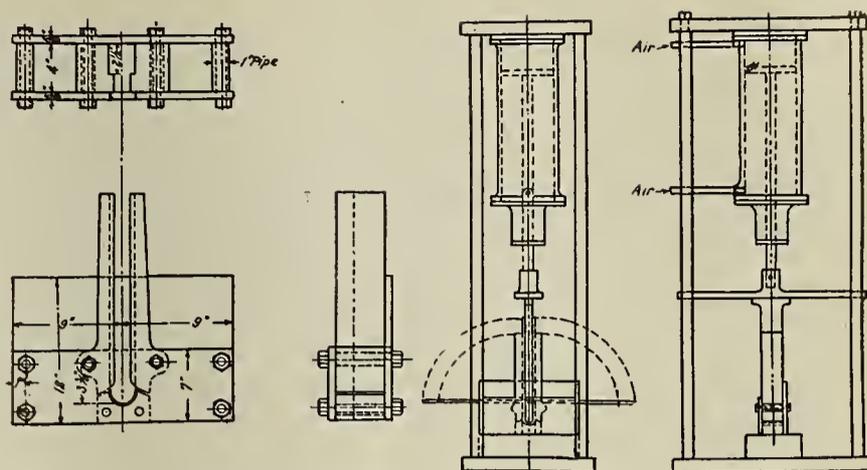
AIR BENDING MACHINE WITH FORMER.
